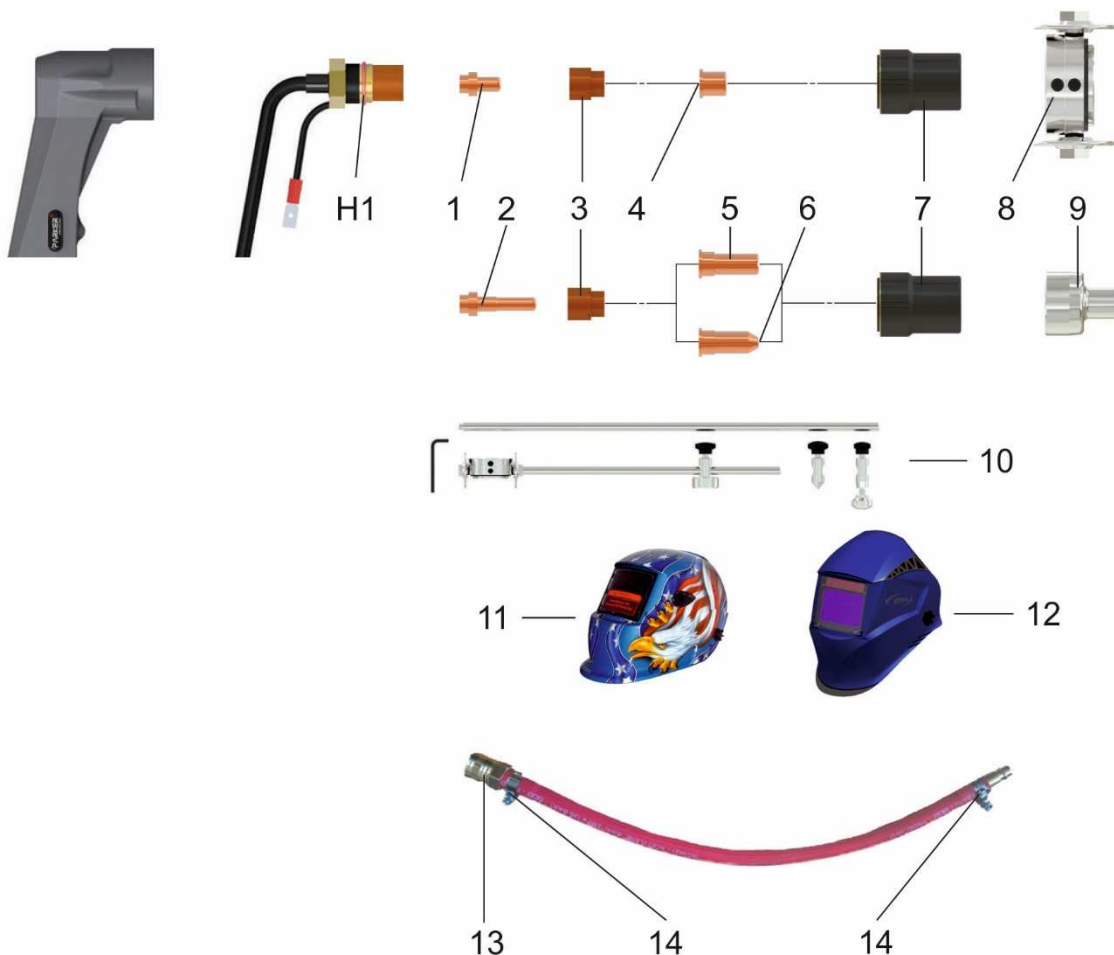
Spare parts of the torch SCB 50, machine and adapter
